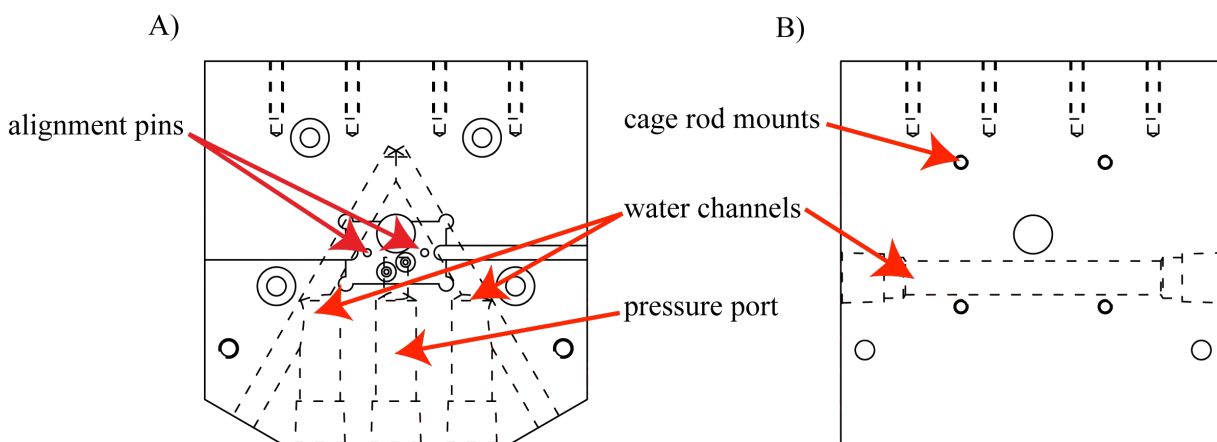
Drawings of A) bottom and B) top plate of environmental chamber. Internal water cooling passages and pressure ports are represented by dashed lines. Pins for aligning the chip were added to the bottom plate and holes to mount the laser cage rod assembly were located in the top plate.
